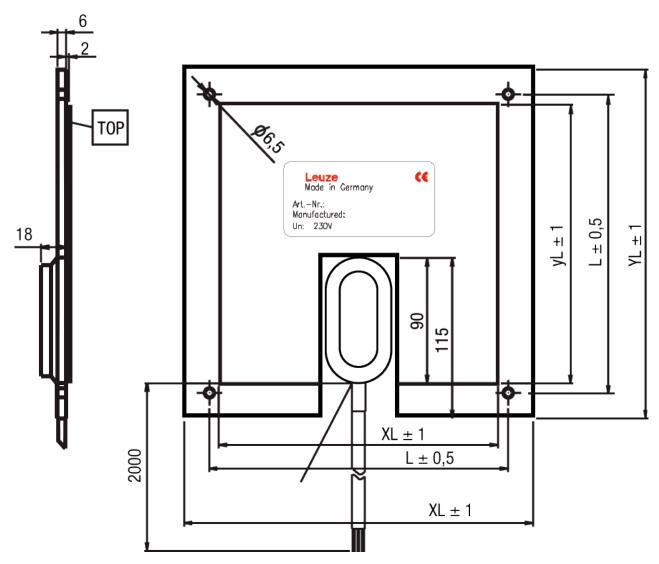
Dimensioned drawing of heated reflector All dimensions in mm
